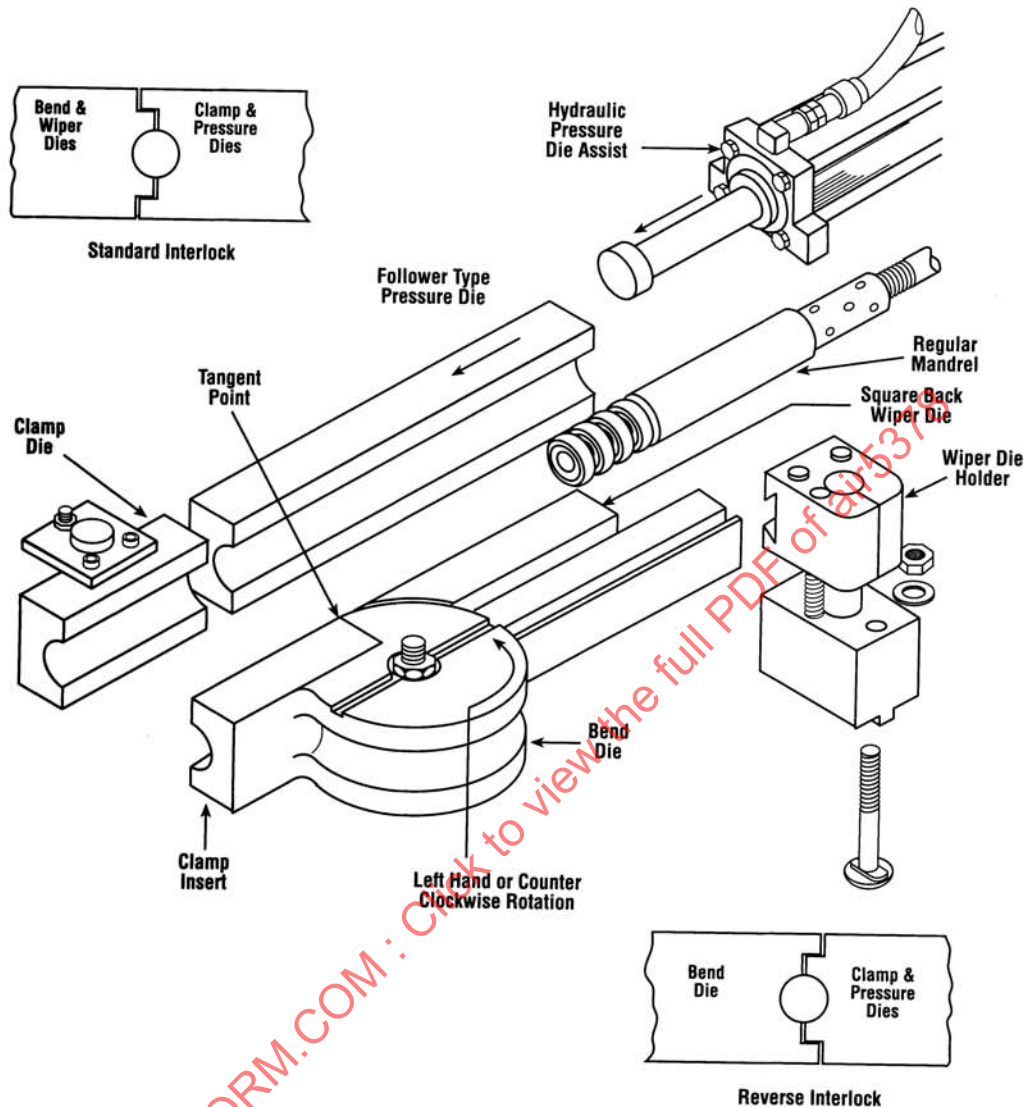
Rotary Draw Bending Tools With Mandrel and Wiper Die
